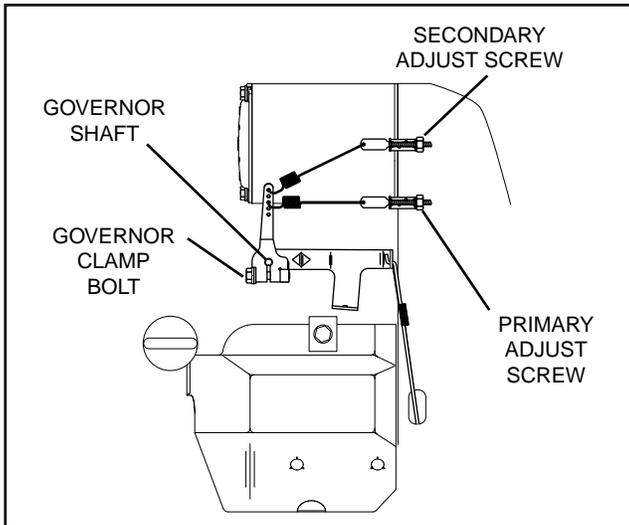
Engine Governor Adjustment Single Cylinder Engines
